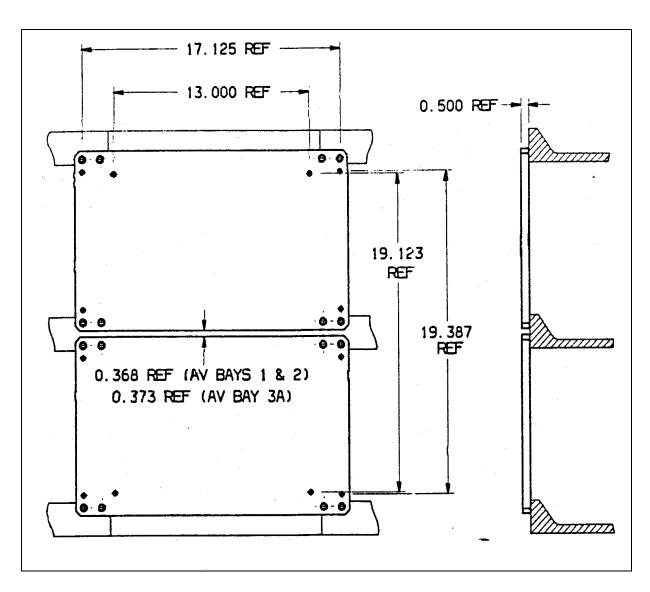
PAYLOAD MOUNTING PANEL (SHEET 1 OF 2)
